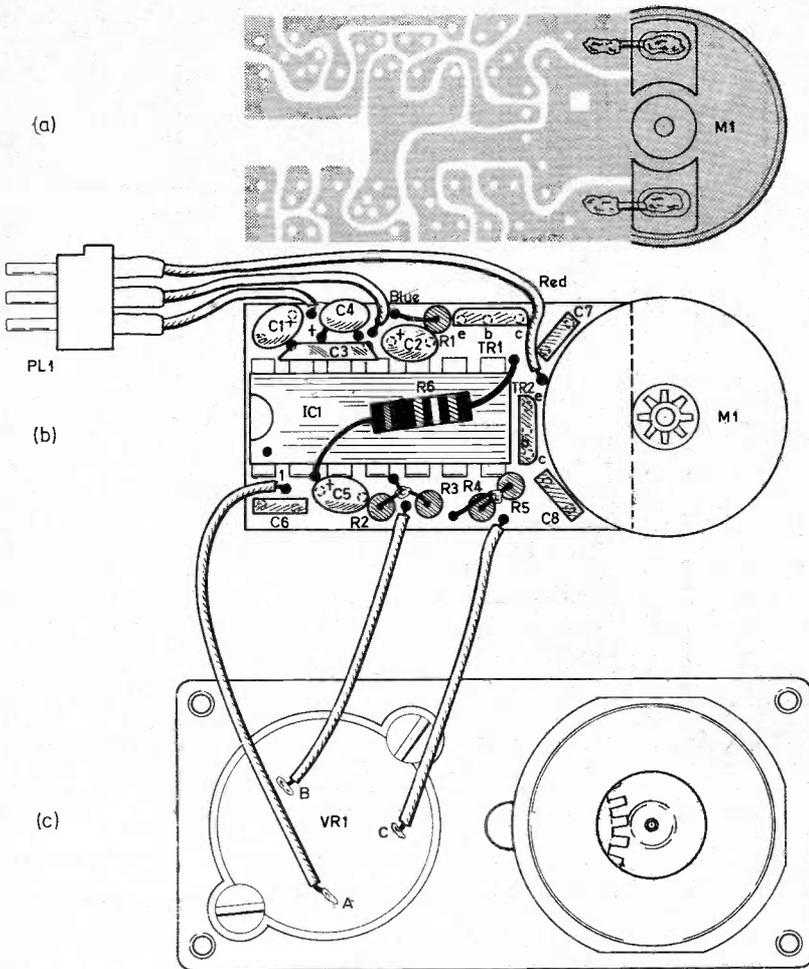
The completed Servo unit (a) Underside view of p.c.b. showing how this is secured to the motor M1 by means of two soldered link wires. (b) Top view of p.c.b. (twice actual size) with all components in situ, and showing external wiring. (c) Underside of servo mechanics showing connections to the feedback pot VR1.
